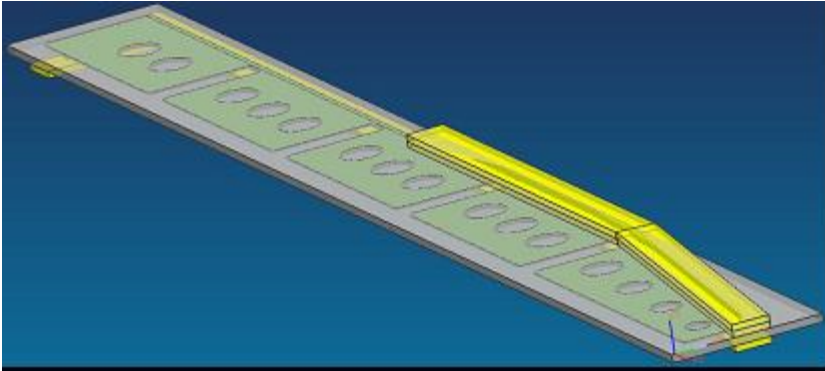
Schematic of Bottom Plate Attachment Welds.
